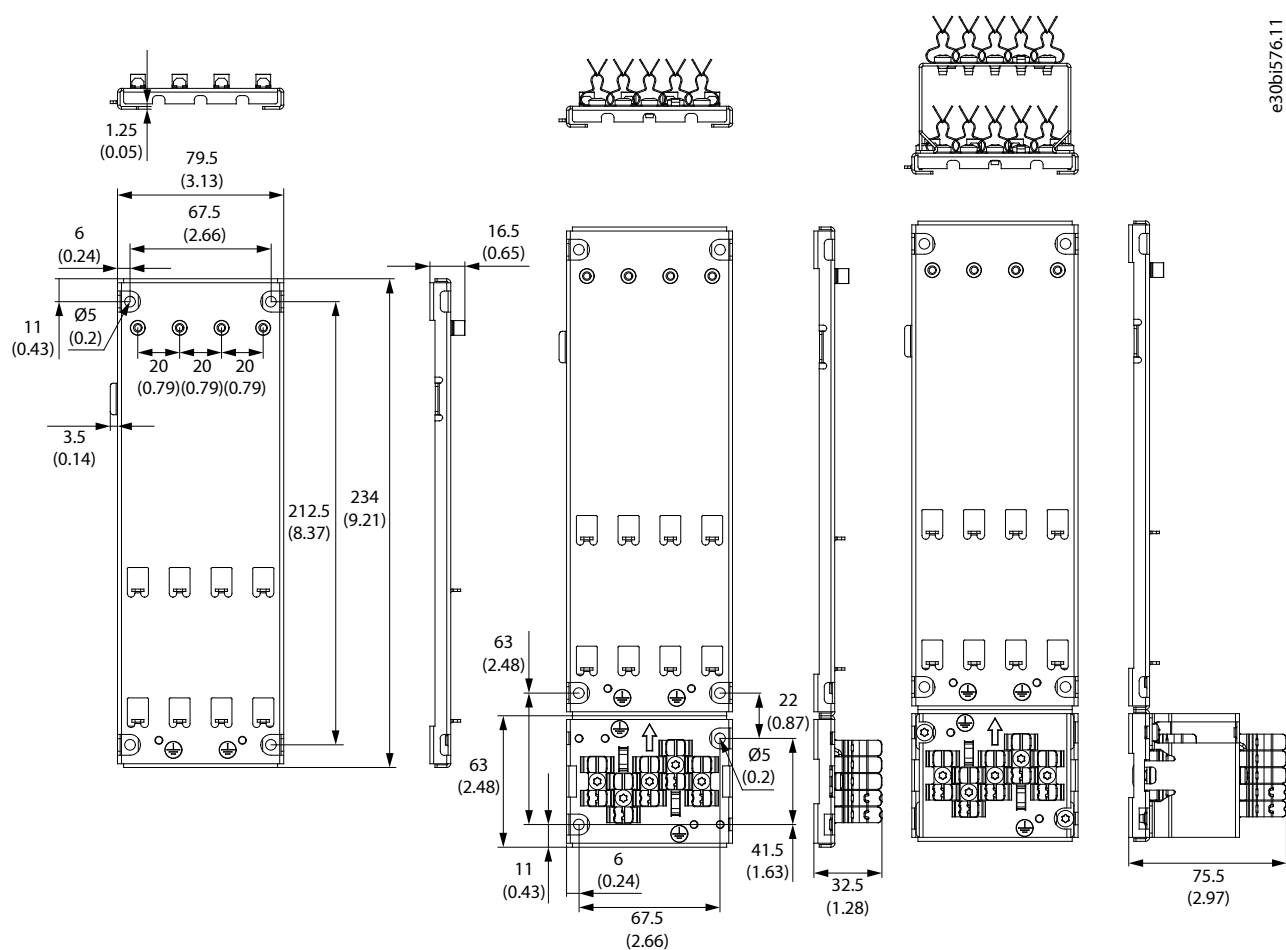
Dimensions of the Modular Control Unit Mounting Plate in mm (in), 4 Places
